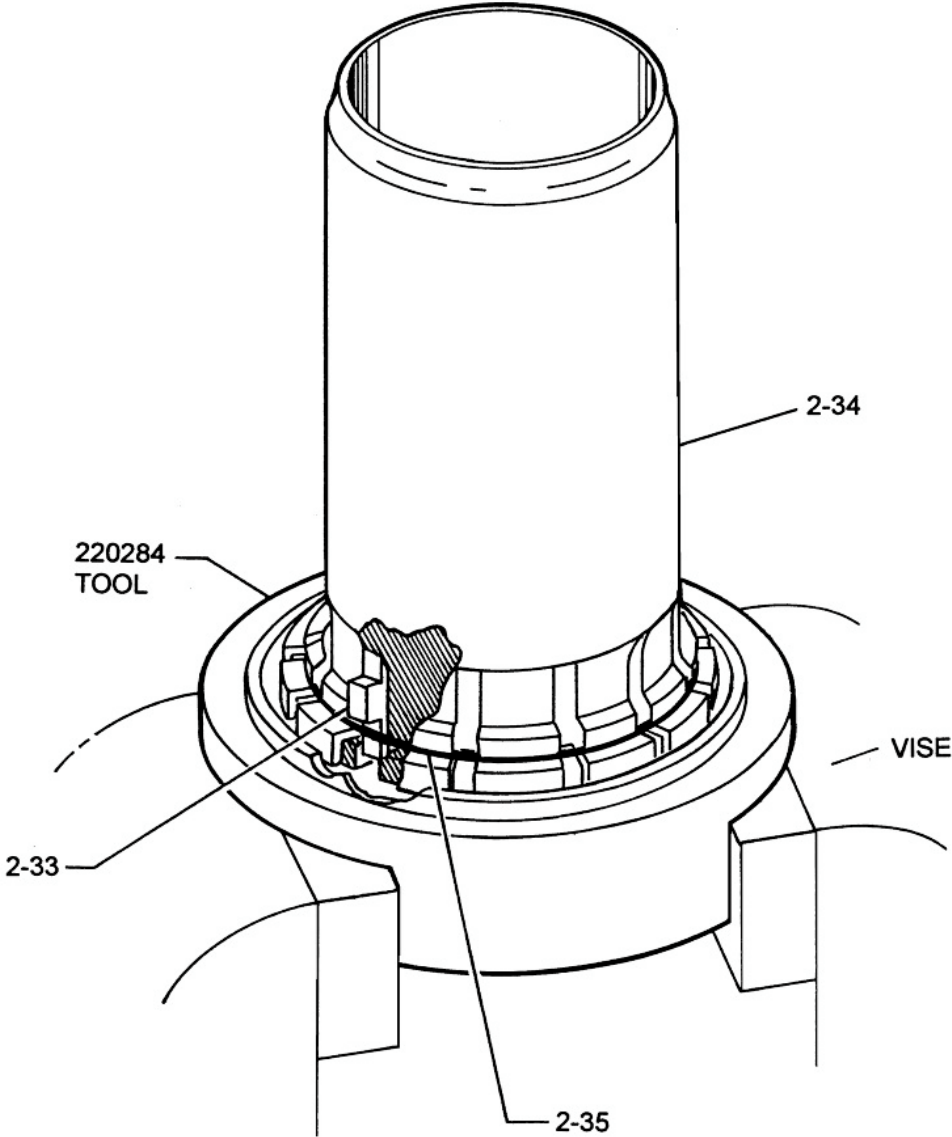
USE OF 220284 TOOL TO INSTALL STAY BACK DETENTS (33)
